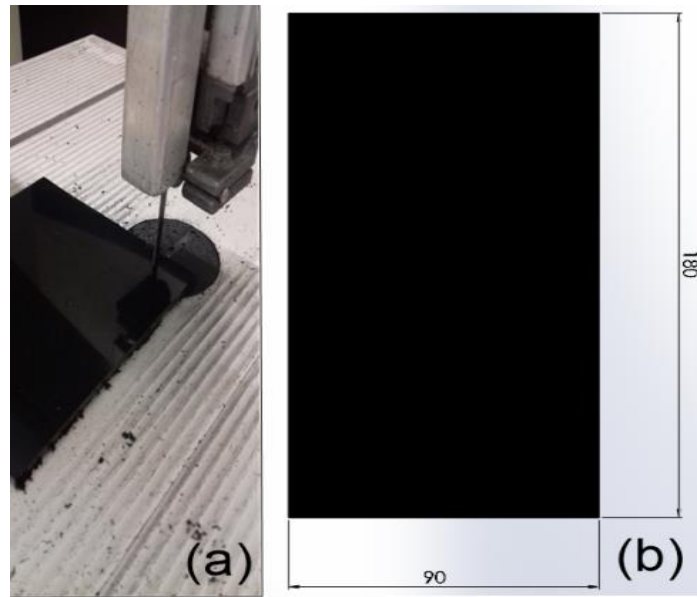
Saw cutting of the 3mm plates (a); Dimension of the plates (mm) (b).
